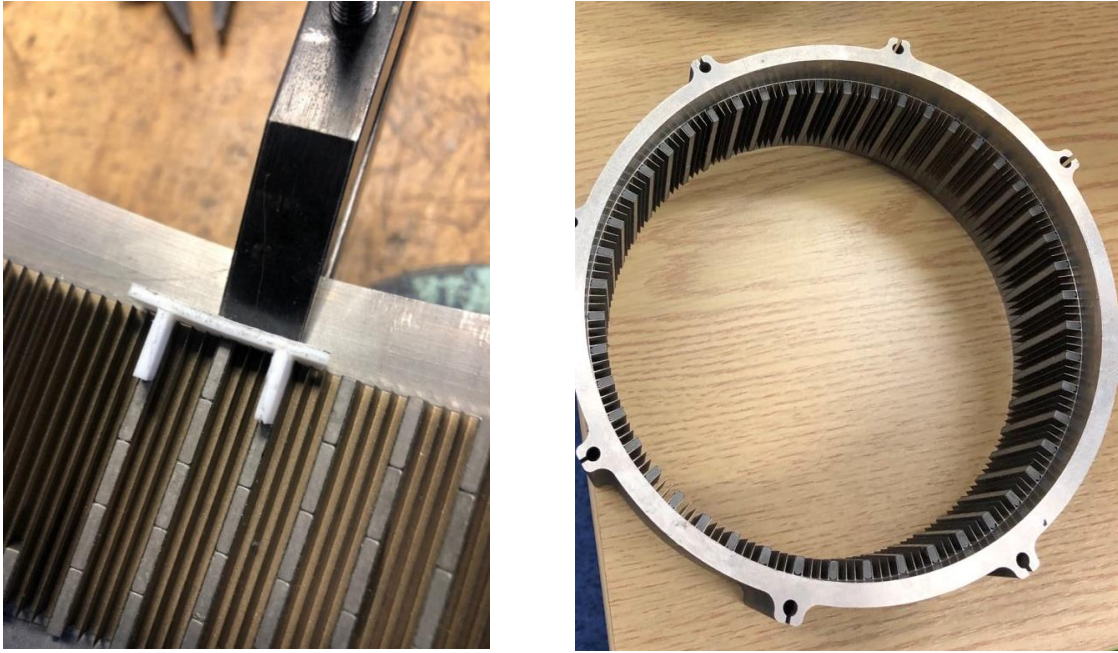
Rotor magnet assembly – first pass of one piece in each pole pair
